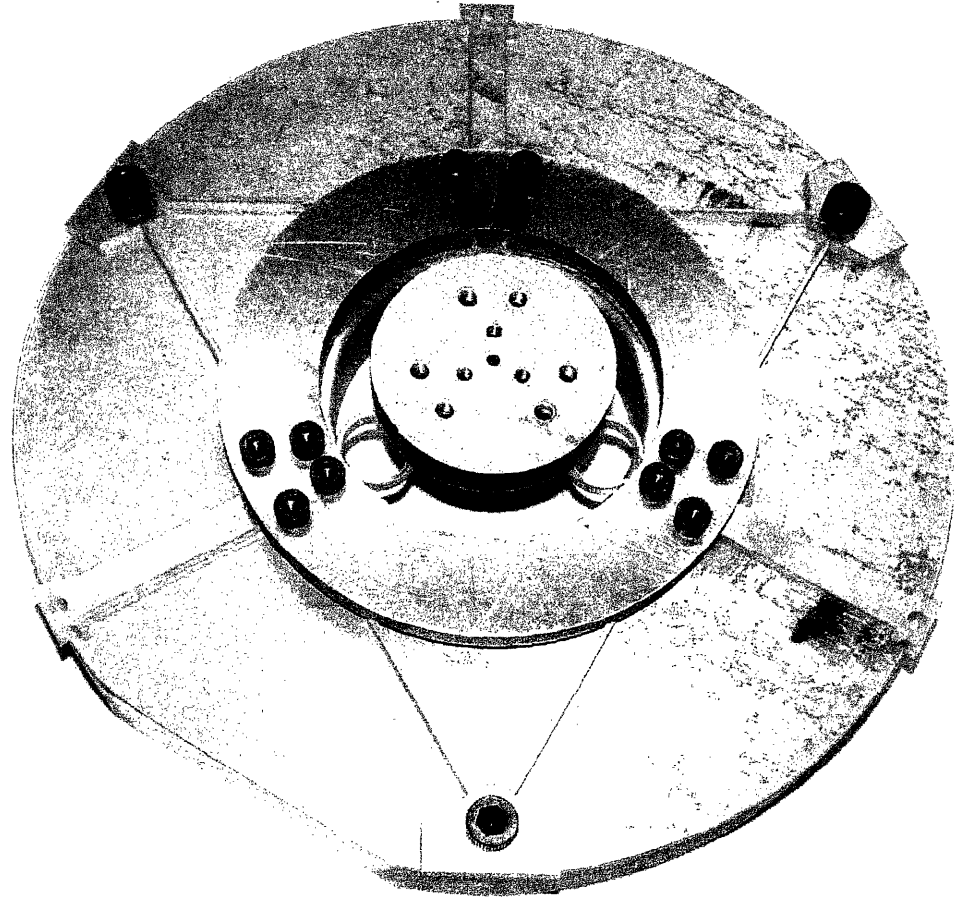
Fully Assembled Tooling and Mechanism, Ready to be Pressed
